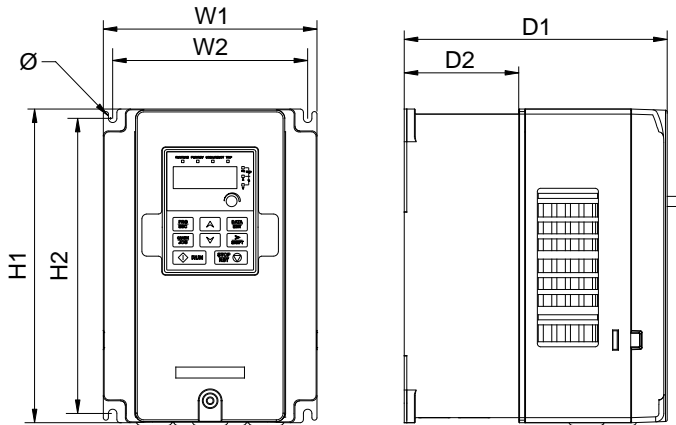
Wall installation diagram for 380V 7.5kW–37kW VFD models
